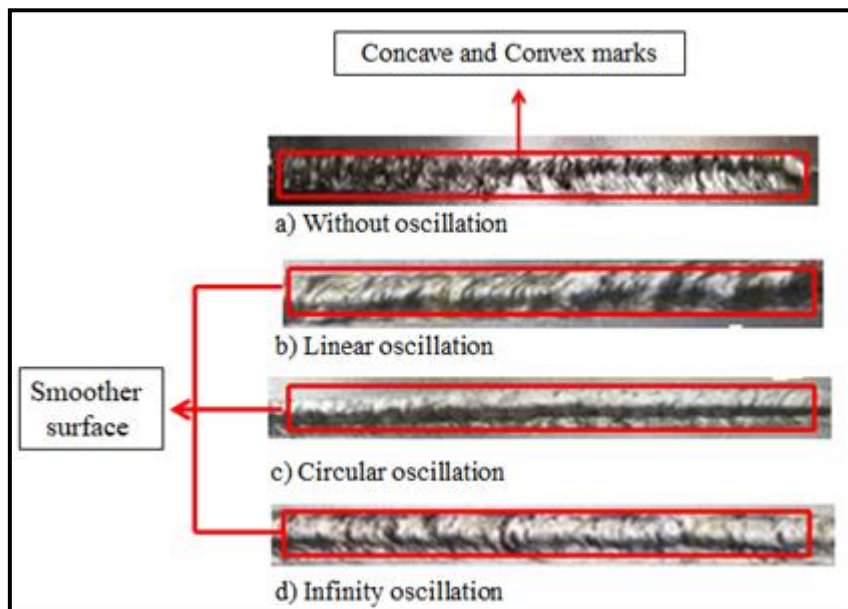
Observation of laser welding with different types of oscillation [30]
